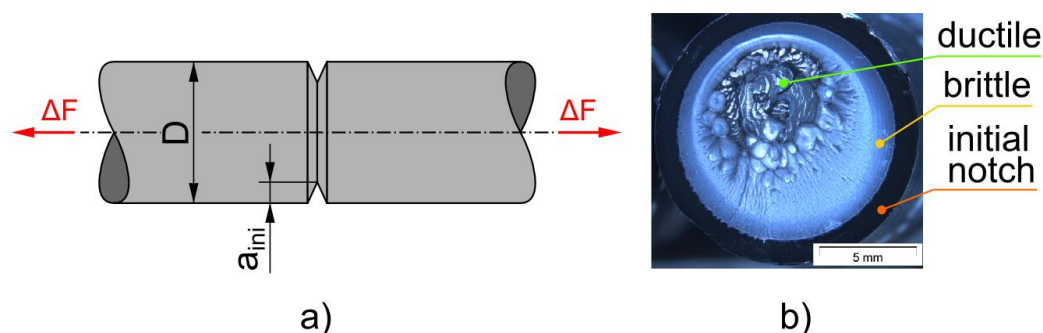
Scheme of the CRB specimen (a) and the fracture surface after a finished CRB test (b)
